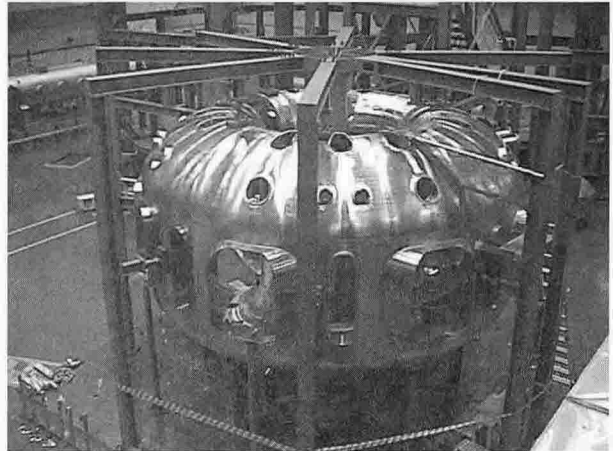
Overview of vacuum vessel after seam welding.
